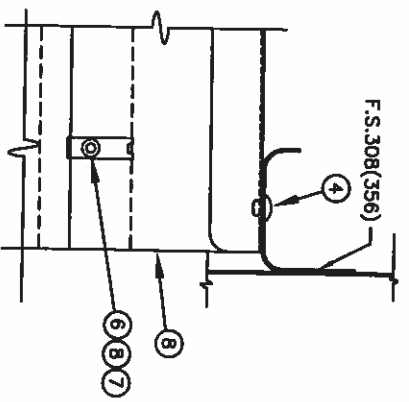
END VIEW-REAR FLANGE ATTACHMENT (TYP)
